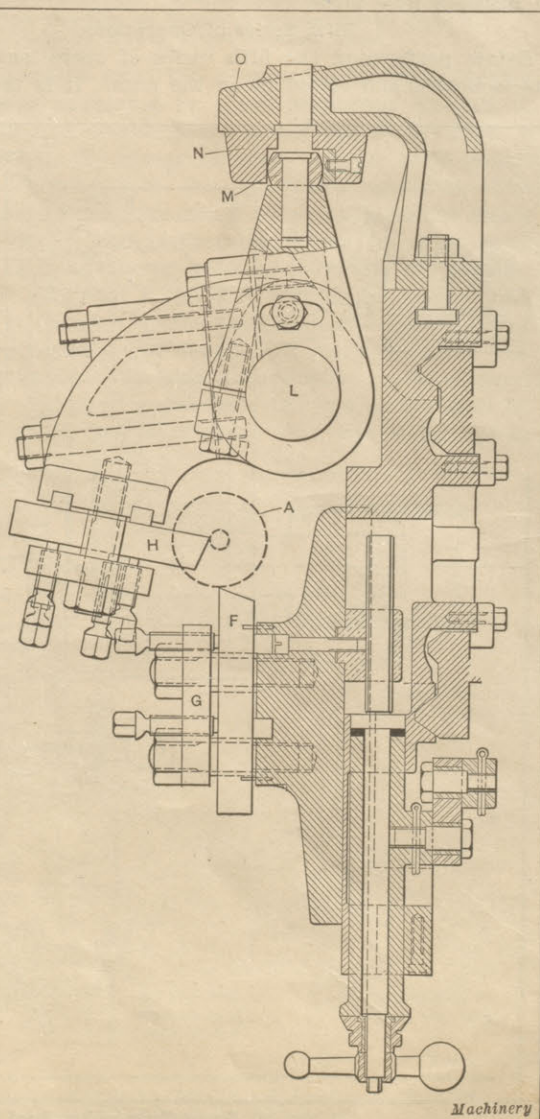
Tool Layout for performing Second Series of Operations on Reed-Prentice Heavy Type Automatic Lathe
